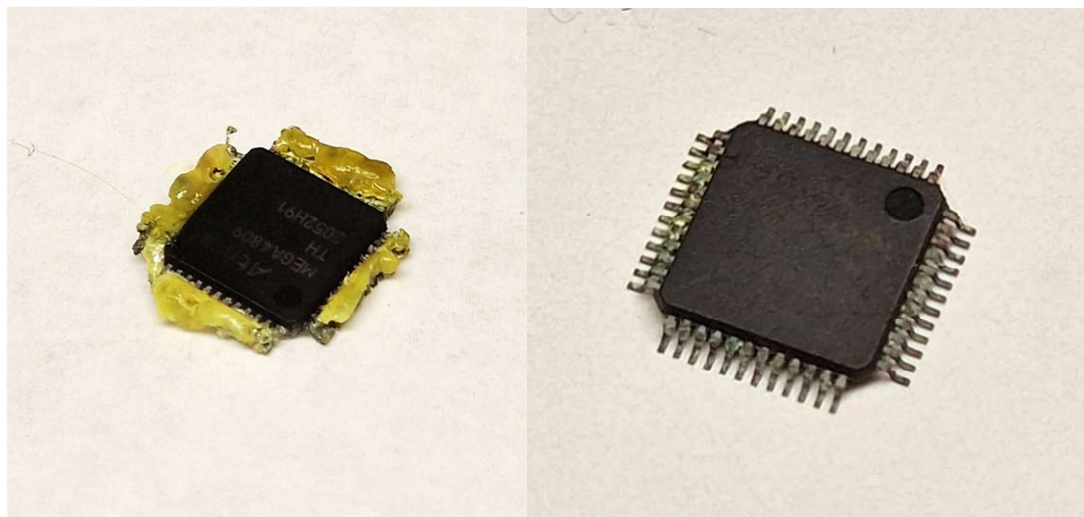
Left: PCB with printed desoldering paste immediately after printing, right: PCB with printed desoldering paste after 30 'embedded in 'heat wet' at a temperature of 60 ° C.
